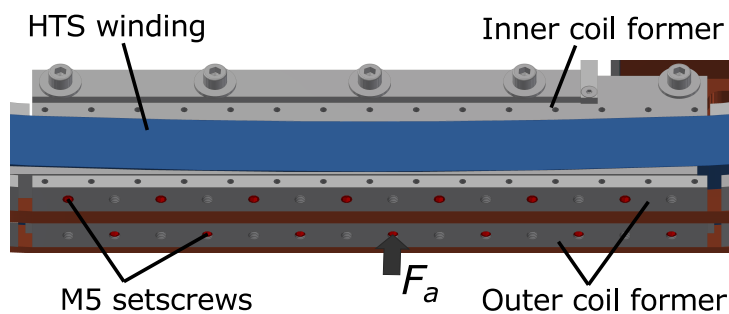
Straight part of a DPC with red marked setscrews to apply additional mechanical pressure on the HTS winding. The upper copper plate is removed for better visibility
